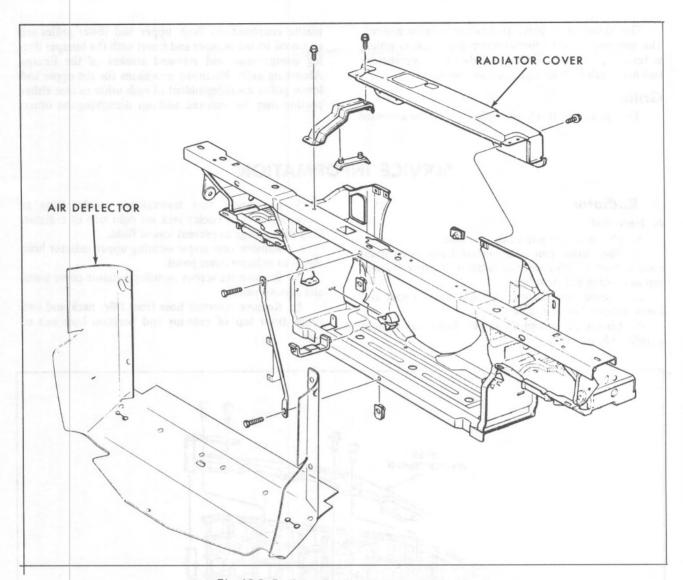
Radiator Cradle Assembly-Eldorado
